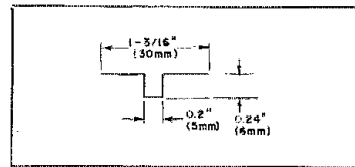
Dimensions for L6. The material is no. 24 copper wire. If possible it should be silver plated.
